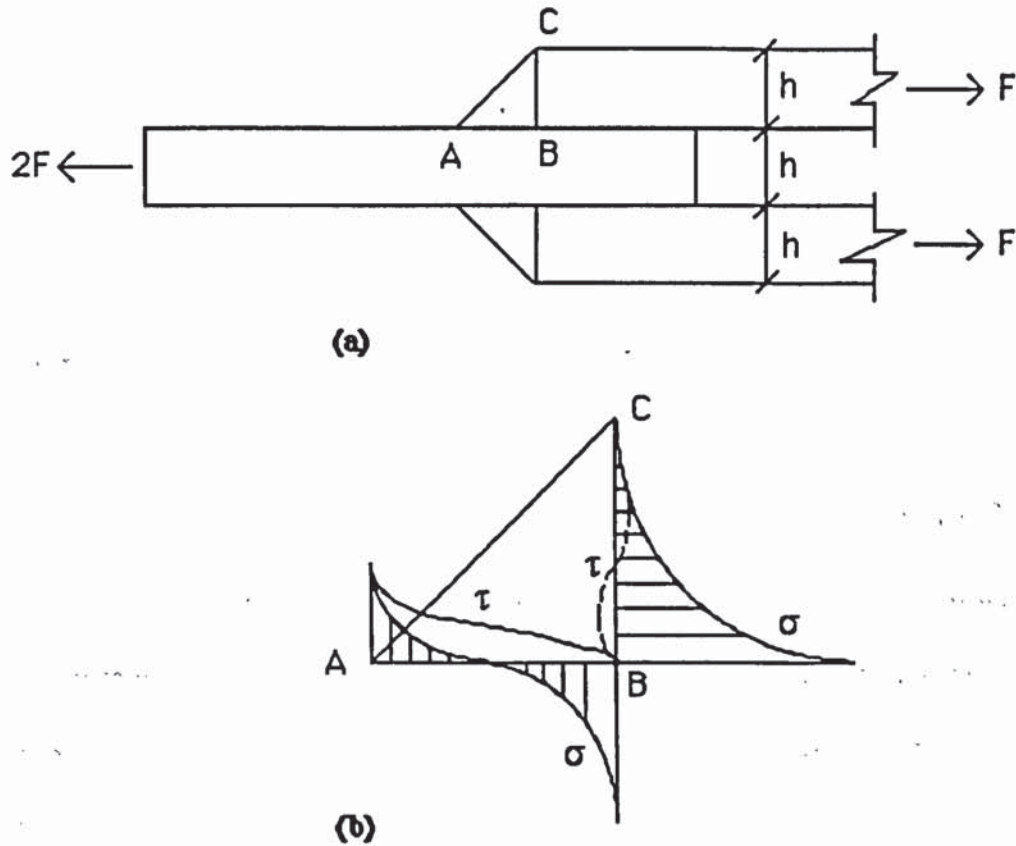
(a) Transverse fillet weld specimen tested by Norris.
